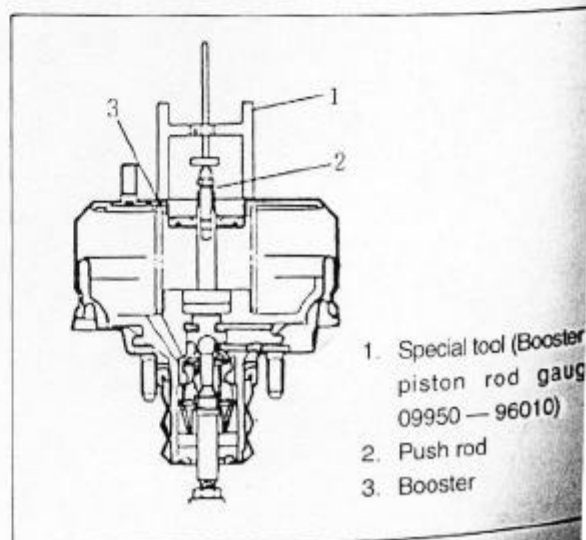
33 BOOSTER PUSH ROD CLEARANCE MEASUREMENT
